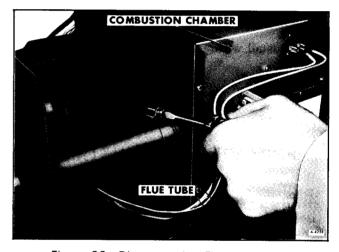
Disconnecting Flue Tube from Combustion Chamber
